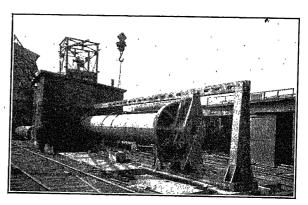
48-In. Pipe, 30 Ft. Long Fabricated From Two $\frac{1}{2}$ -In. Plates by Automatic Arc Welding Undergoing Hydrostatic Pressure Test of 240 Lb.
